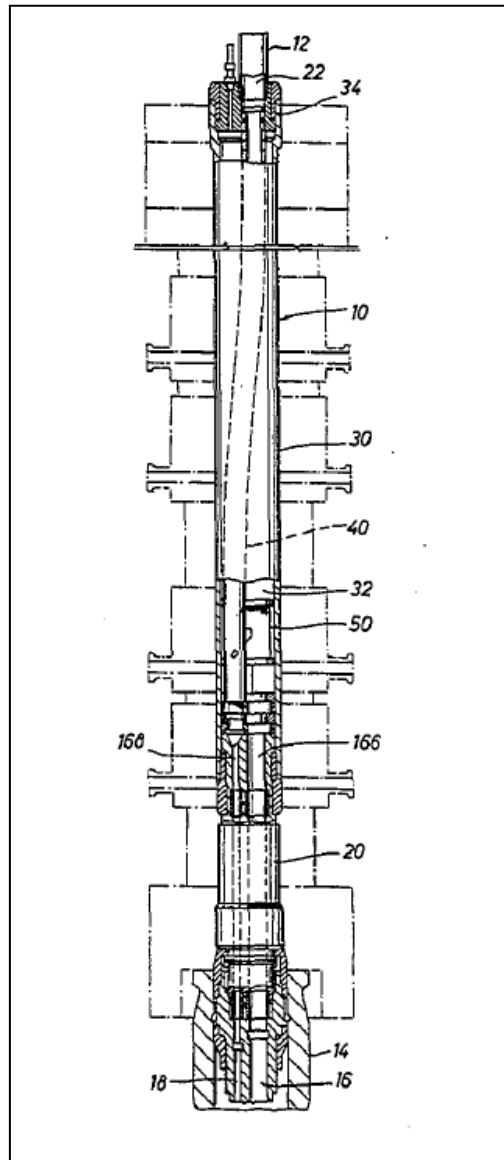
Bore selector attached to a riser at its upper end and to a running tool and wellhead at its lower end with the bore selector being shown communicating with the production bore of the wellhead(Cooper Industries, 1995)
